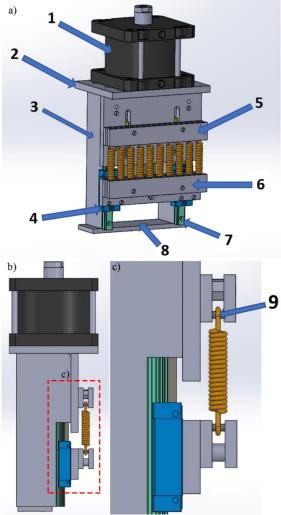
Machine design views from a) Isometric perspective, b) Left and c) Partial detail from the left view (a) izometrik perspektiften, b) soldan ve c) soldan kısmi detaydan makine tasarım görünümleri)
